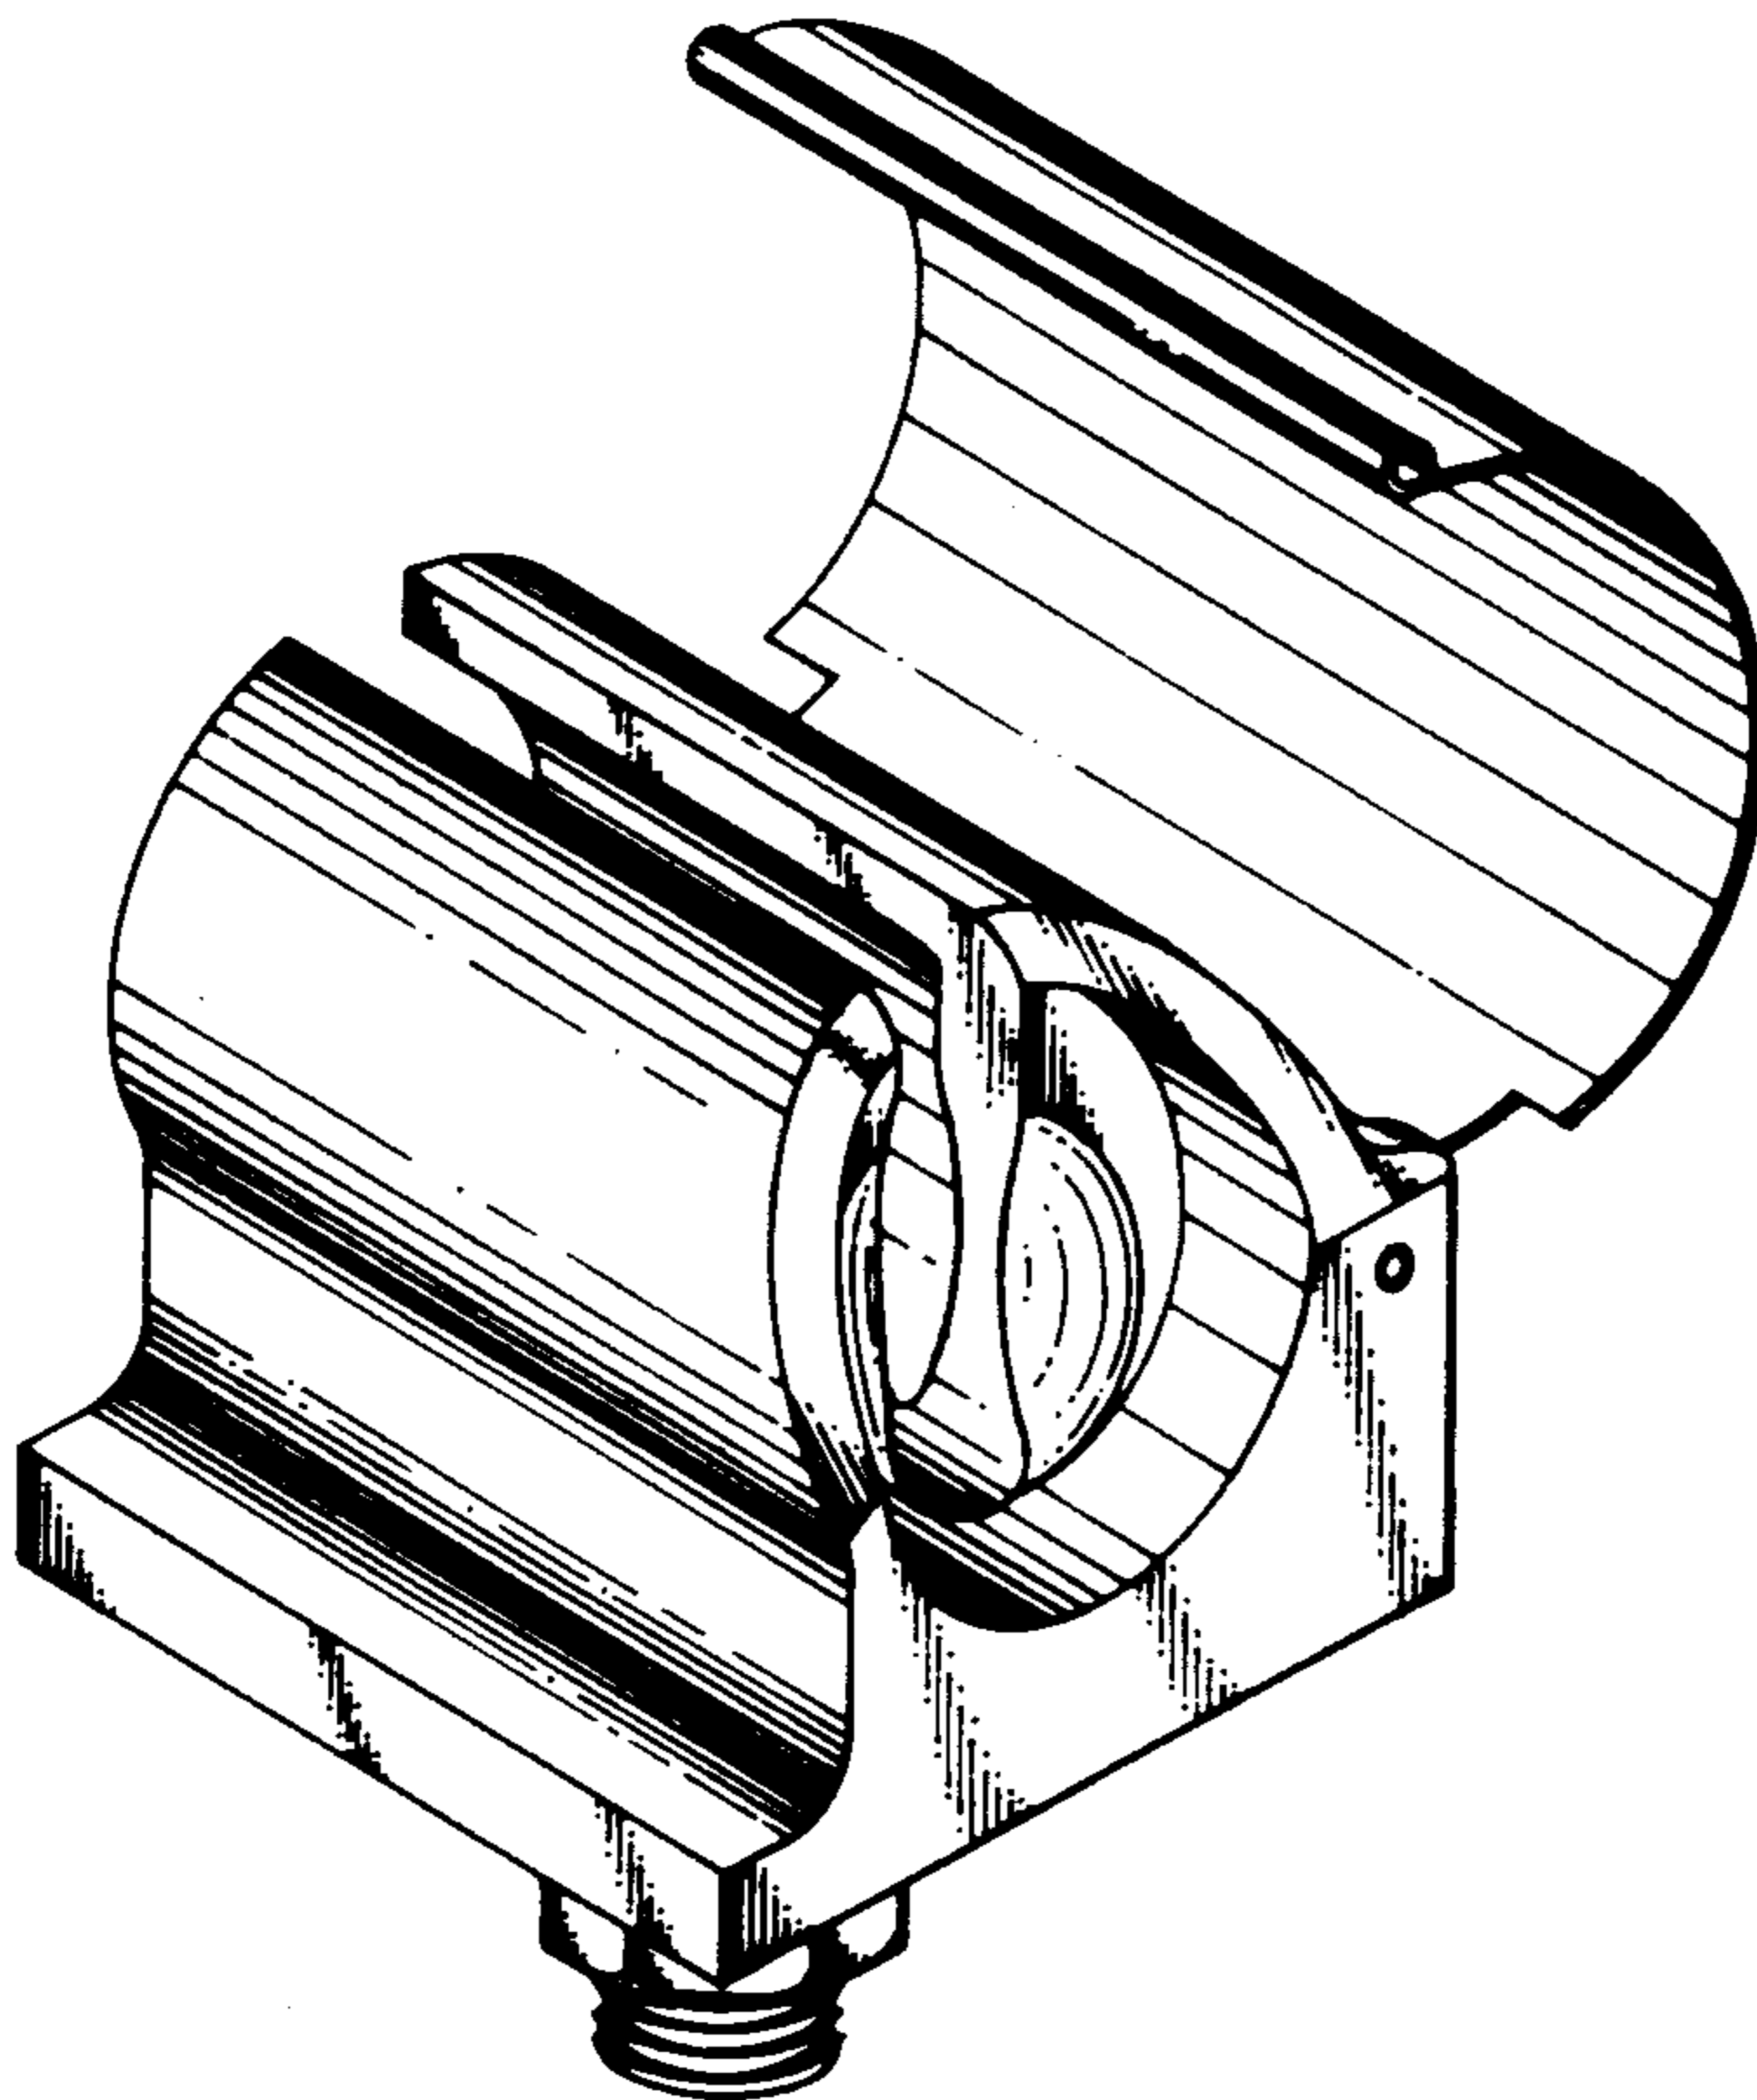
is a perspective view of a safety chain holder, showing my new design, the hinged cover being shown in open position;
